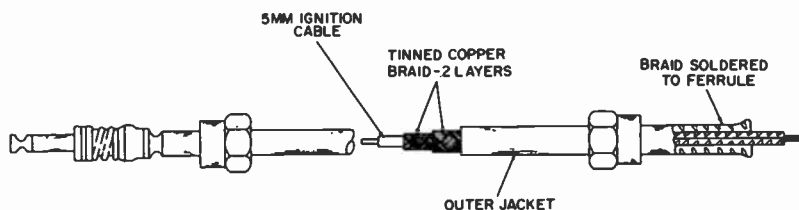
Construction of tinned copper-braid shielding for high-tension ignition cables.
